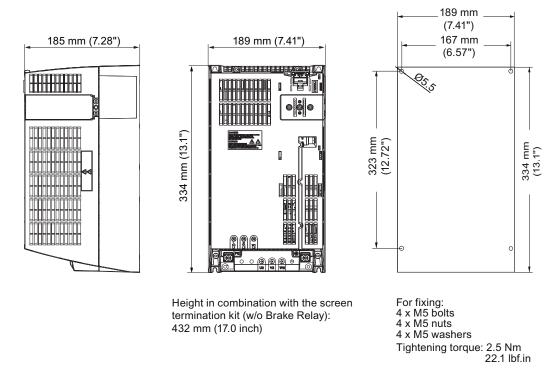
Dimensions and drill pattern for Power Module PM240, FSC, IP20
